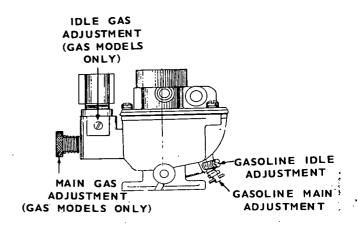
CARBURETOR FUEL MIXTURE ADJUSTMENTS
